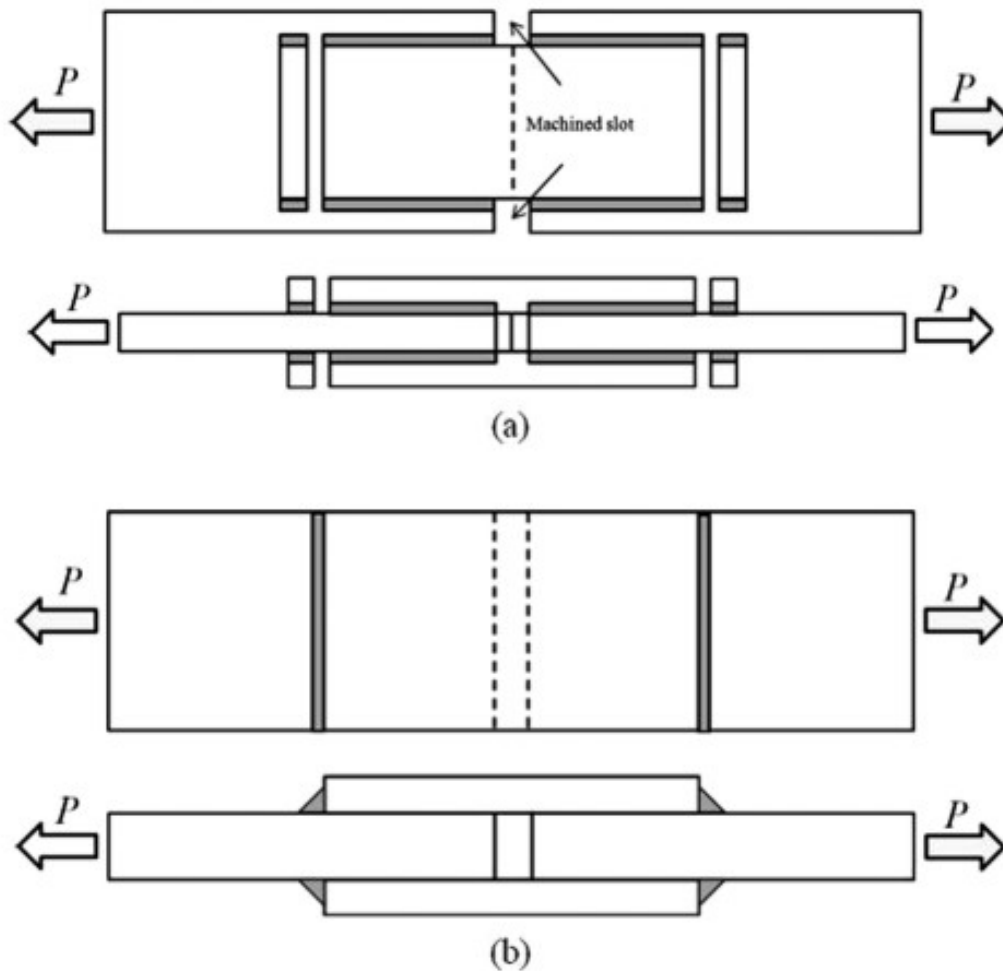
AWS standard shear test specimens (Society, 2007): (a) longitudinal shear weld; (b) transverse shear weld
